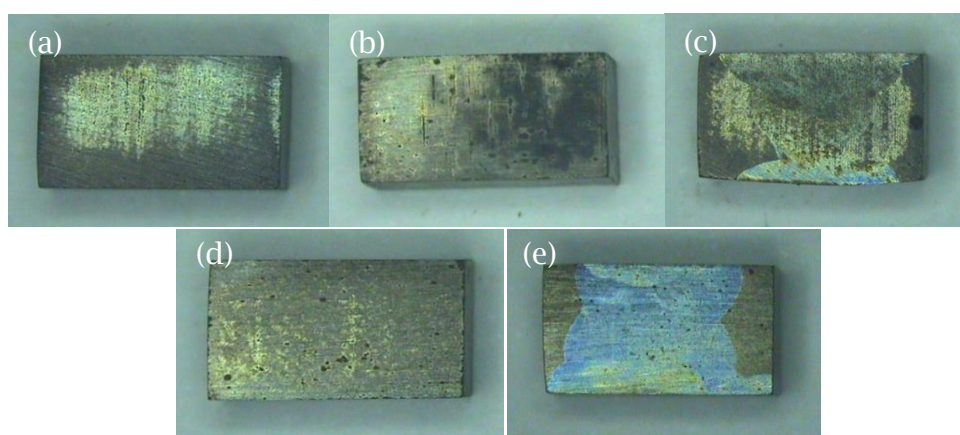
Hot corroded samples of (a) Parent metal; GTA weldments of (b) HAZ (c) Weld and PCGTA weldments of (d) HAZ (e) Weld zone respectively at the end of 50th cycle
